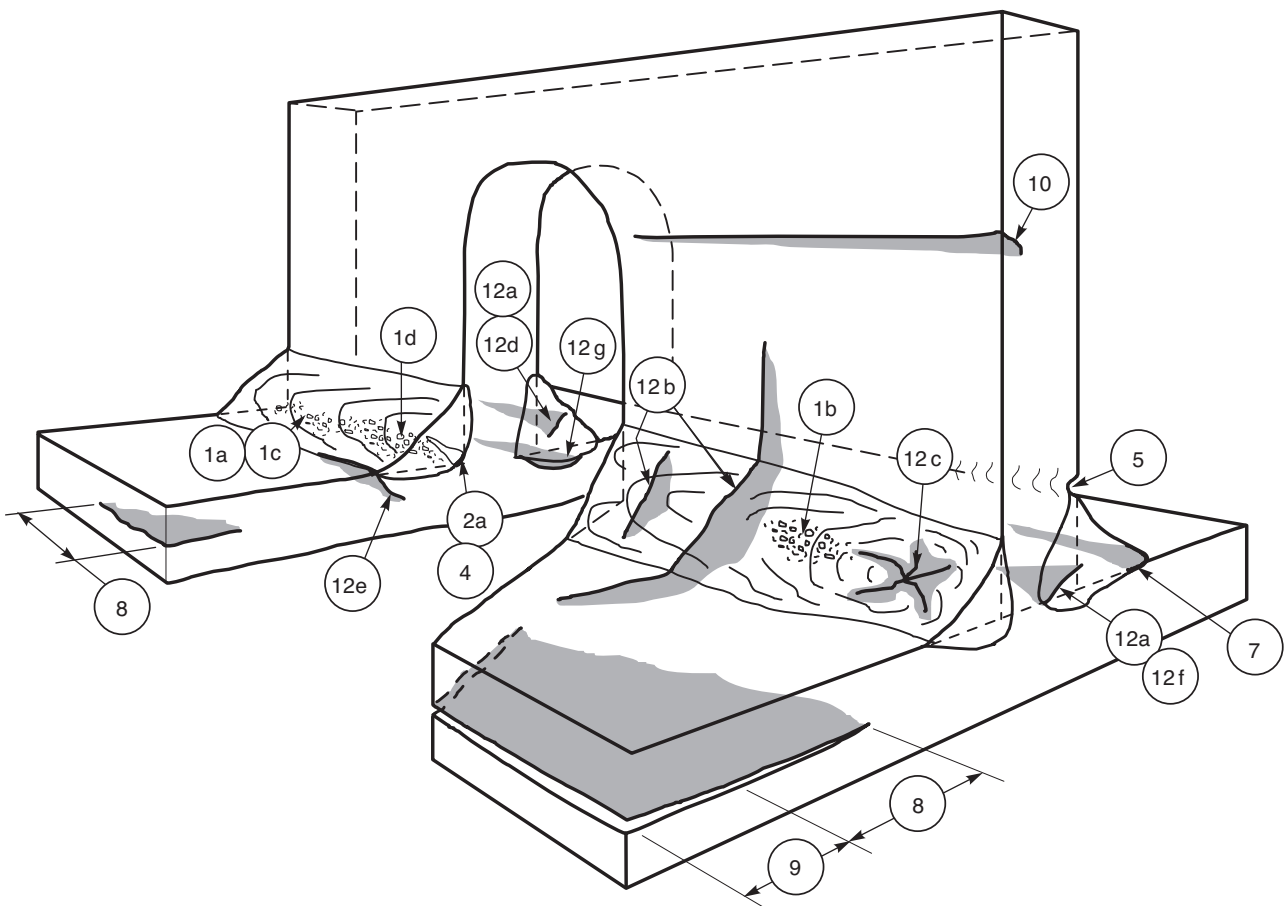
Single-Pass Fillet Weld in T-Joint (see L2)
